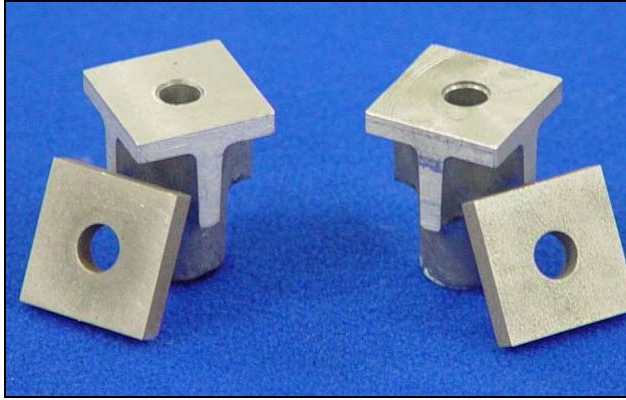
As-cast aluminum nut and washer specimens used for thread-forming fastener torque-tension mechanical testing.
